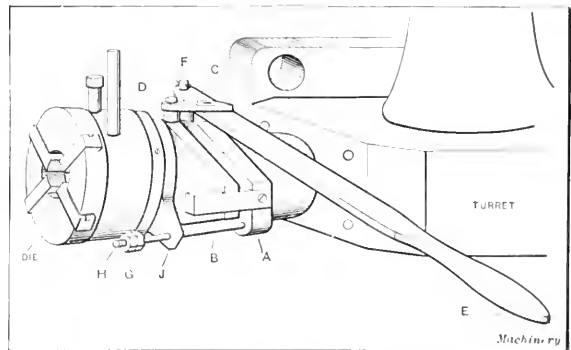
Turret Fixture for threading Work shown in Fig. 1
